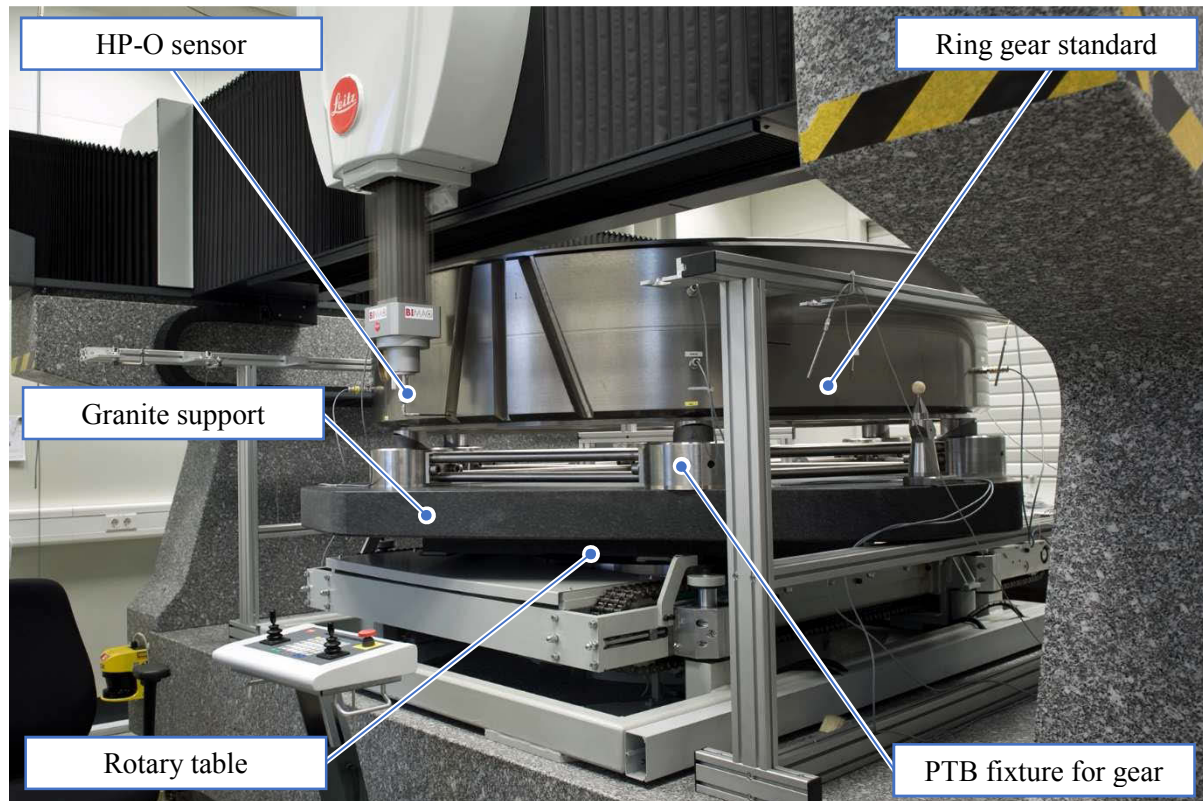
HP-O measurement of the large ring gear measurement standard on a PMM-F with rotary table
